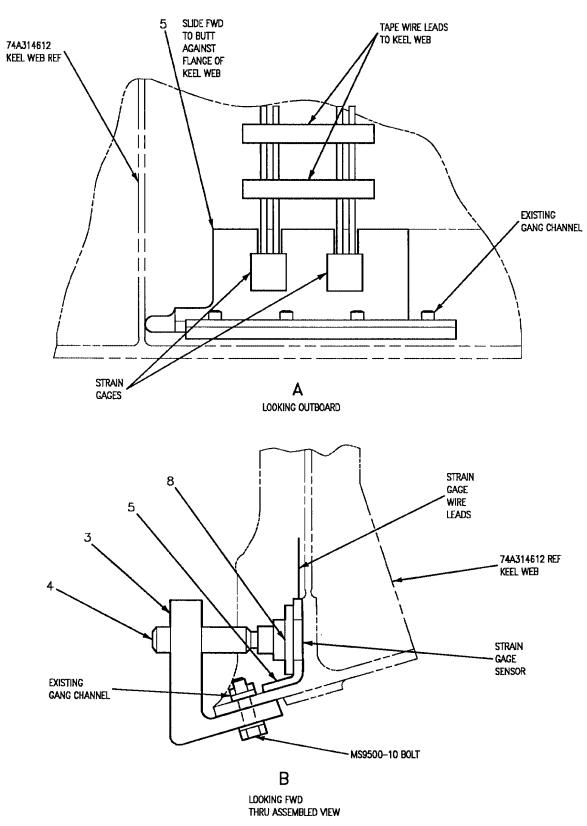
E92110 Strain Gage Bonding Fixture (Sheet 2)
